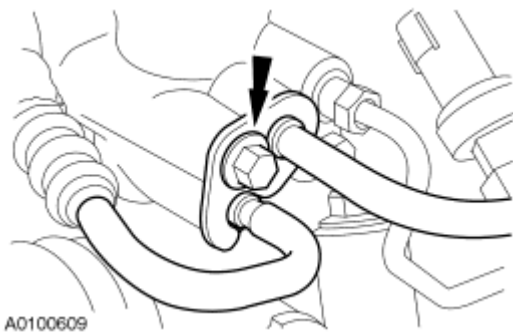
Locating Power Steering Fluid Tubes & Bolt
